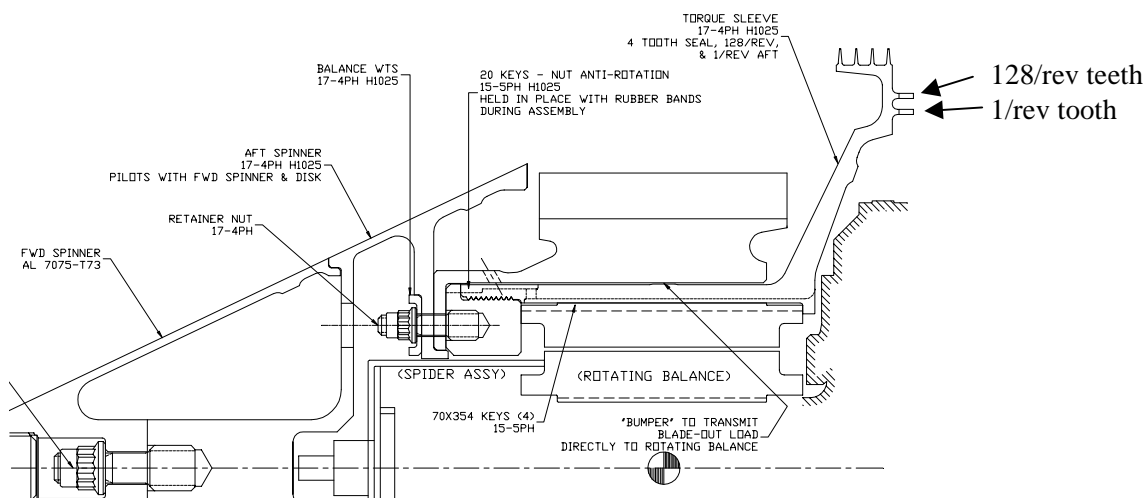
The Torque Sleeve in the Rotating Assembly Has a 1/rev Tooth for rpm Measurement and 128/rev Teeth for Synchronizing the Rotating Rake (See Number 18).
